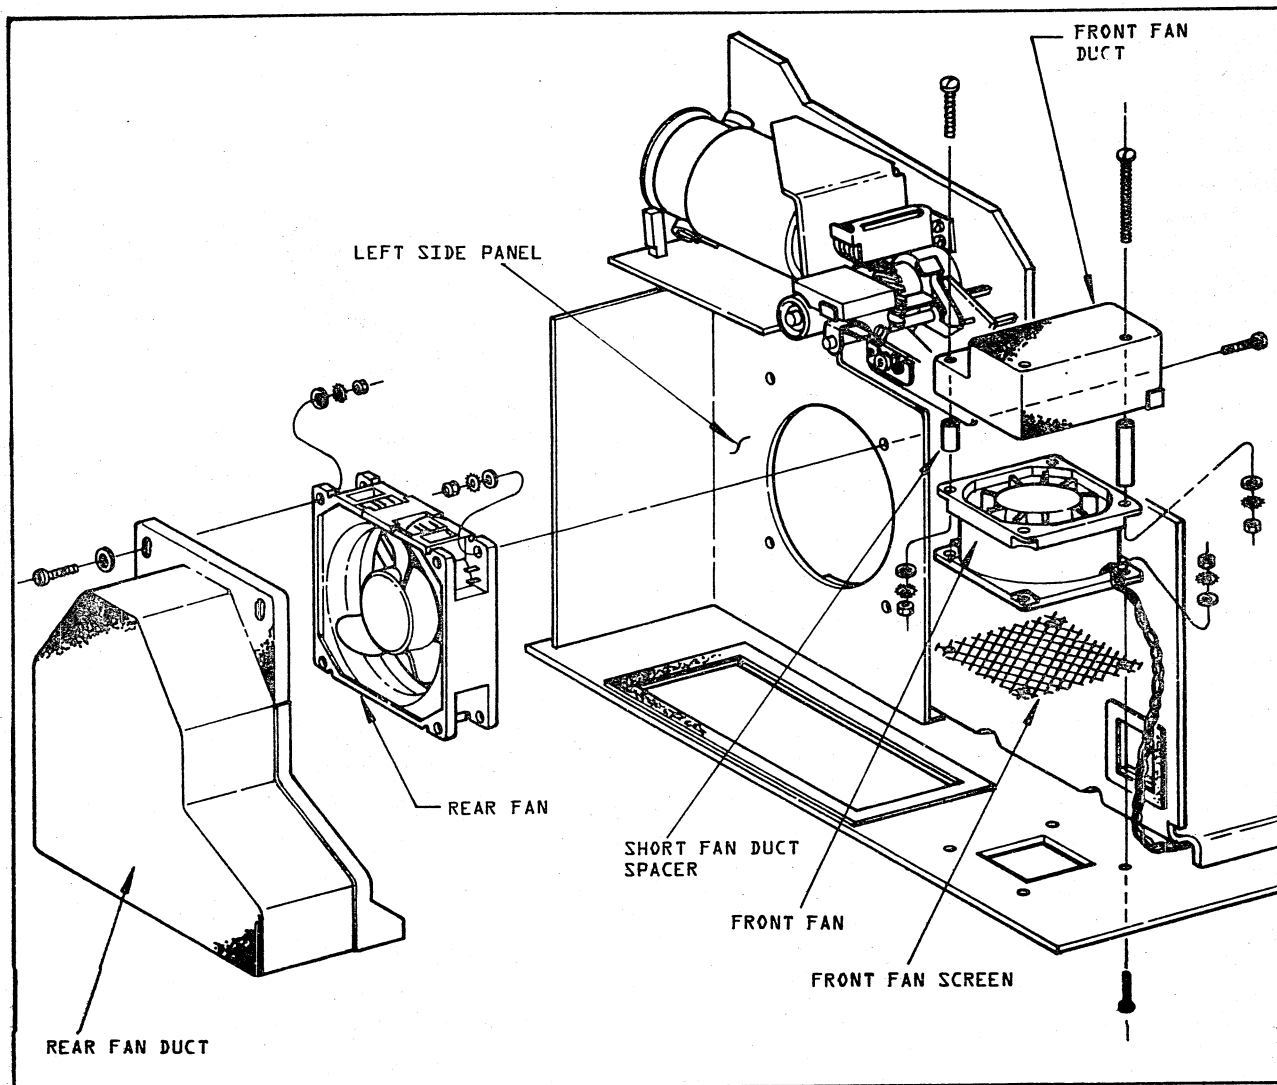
FRONT AND REAR FAN REPLACEMENT
